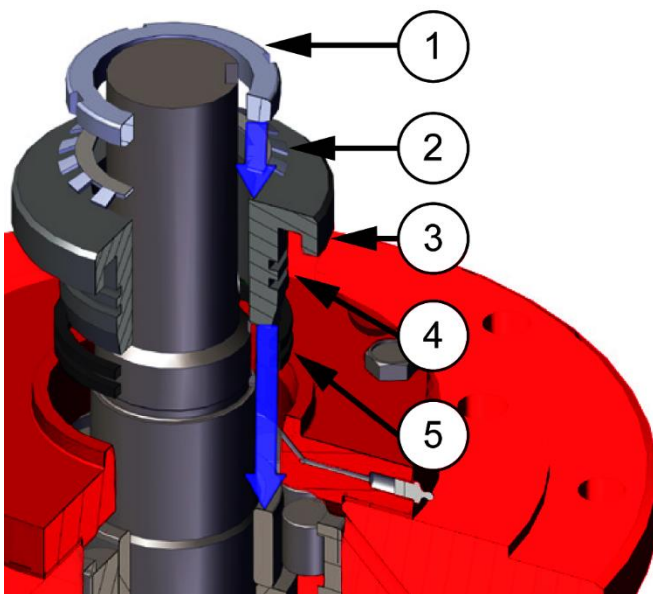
Fitting Labyrinth, Piston Rings, Lockwasher, and the Locknut.
